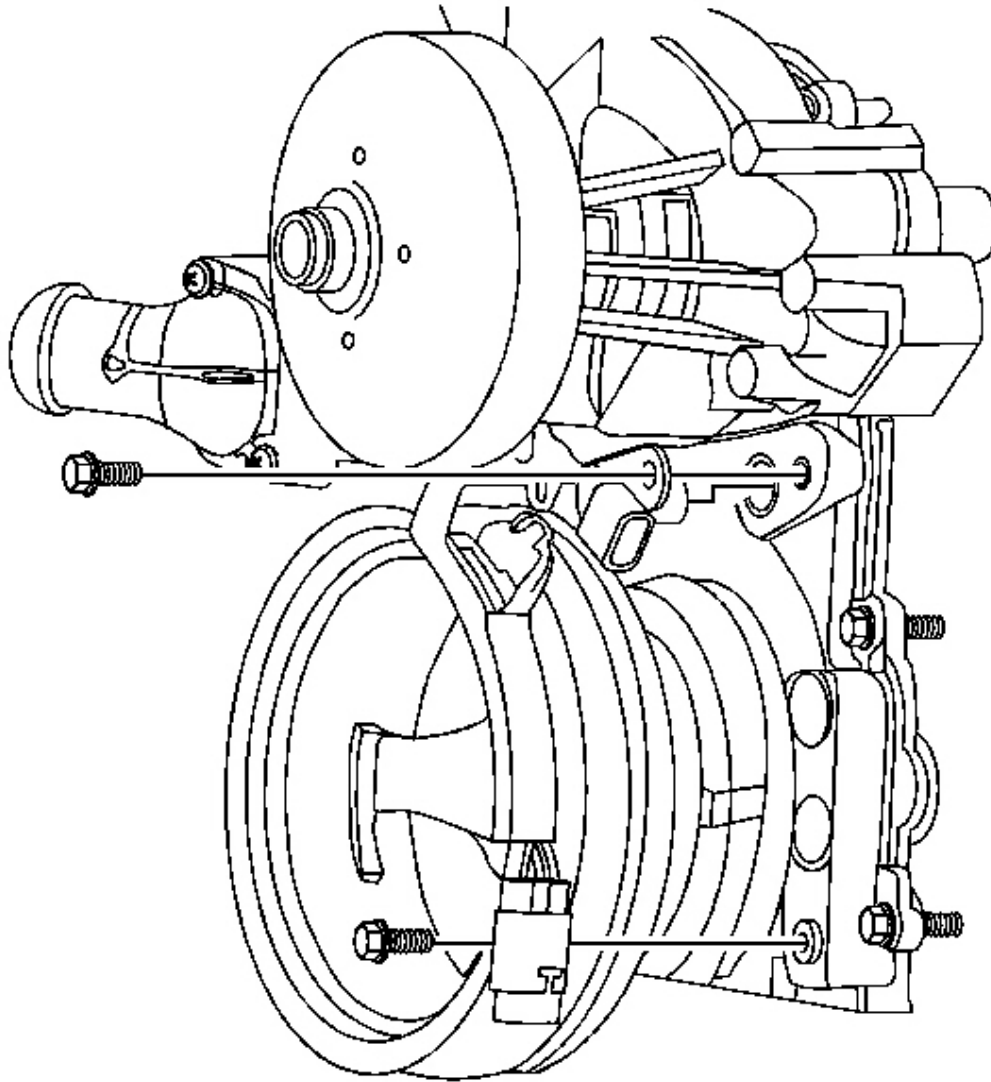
View Of Camshaft Sensor Bolt & Sensor
